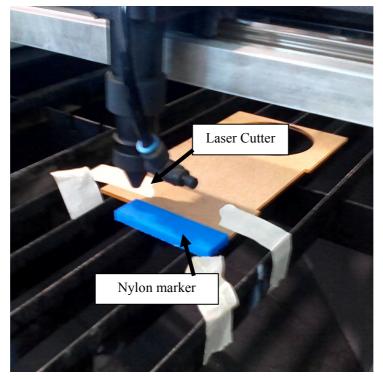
Laser Cutter Machine slicing the blue-coloured Nylon material
